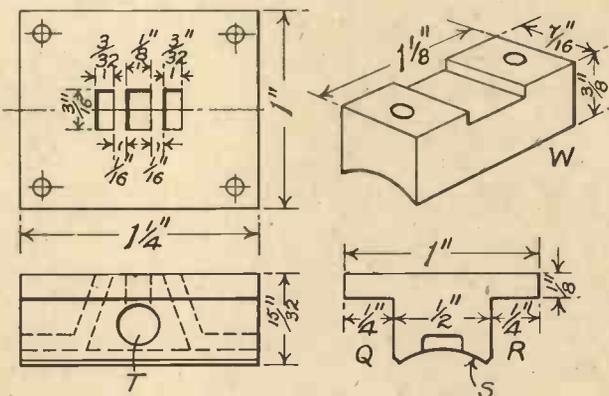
Details of steam-port block, and cylinder fixing lug.
